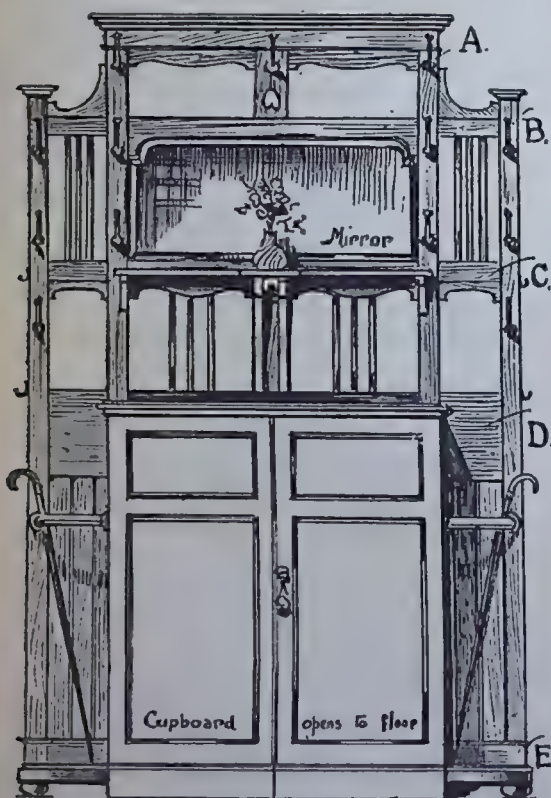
HALL STAND, WITH CUPBOARD FOR HOLDING A TREADLE SEWING MACHINE.
